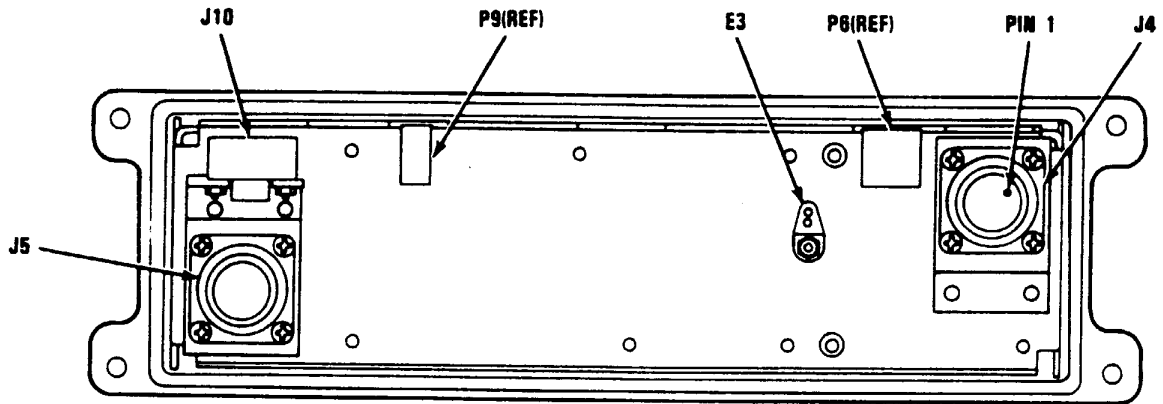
Chassis Assembly A1A1A8 Component and Test Point Location Diagram (Sheet 2 of 3)
